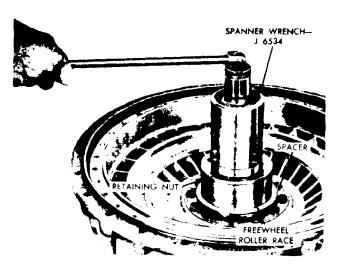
C-12. Removing (or Installing) Freewheel Roller Race Retaining Nut
